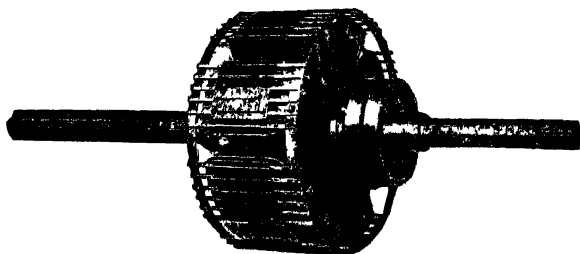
CAGE WINDING TYPE OF DAMPERS
